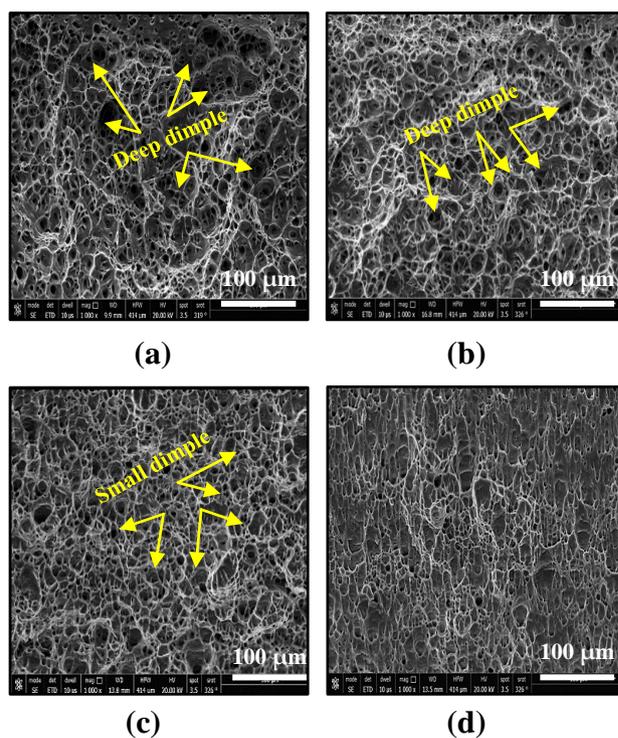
Tensile fractured surfaces of 1050-aluminum before and after the ECAP process: (a) 0 pass, (b) 1 pass, (c) 2 passes and (d) 3 passes.
